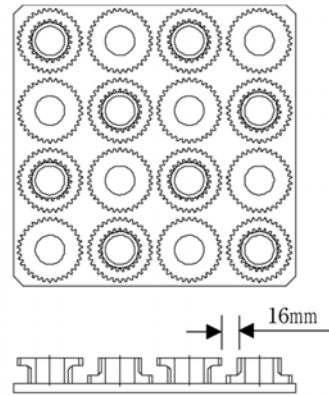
Improved arrangement (automated arrangement, alternating sprockets face up/down).
